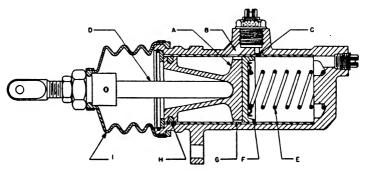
GOODYEAR MASTER CYLINDER.
